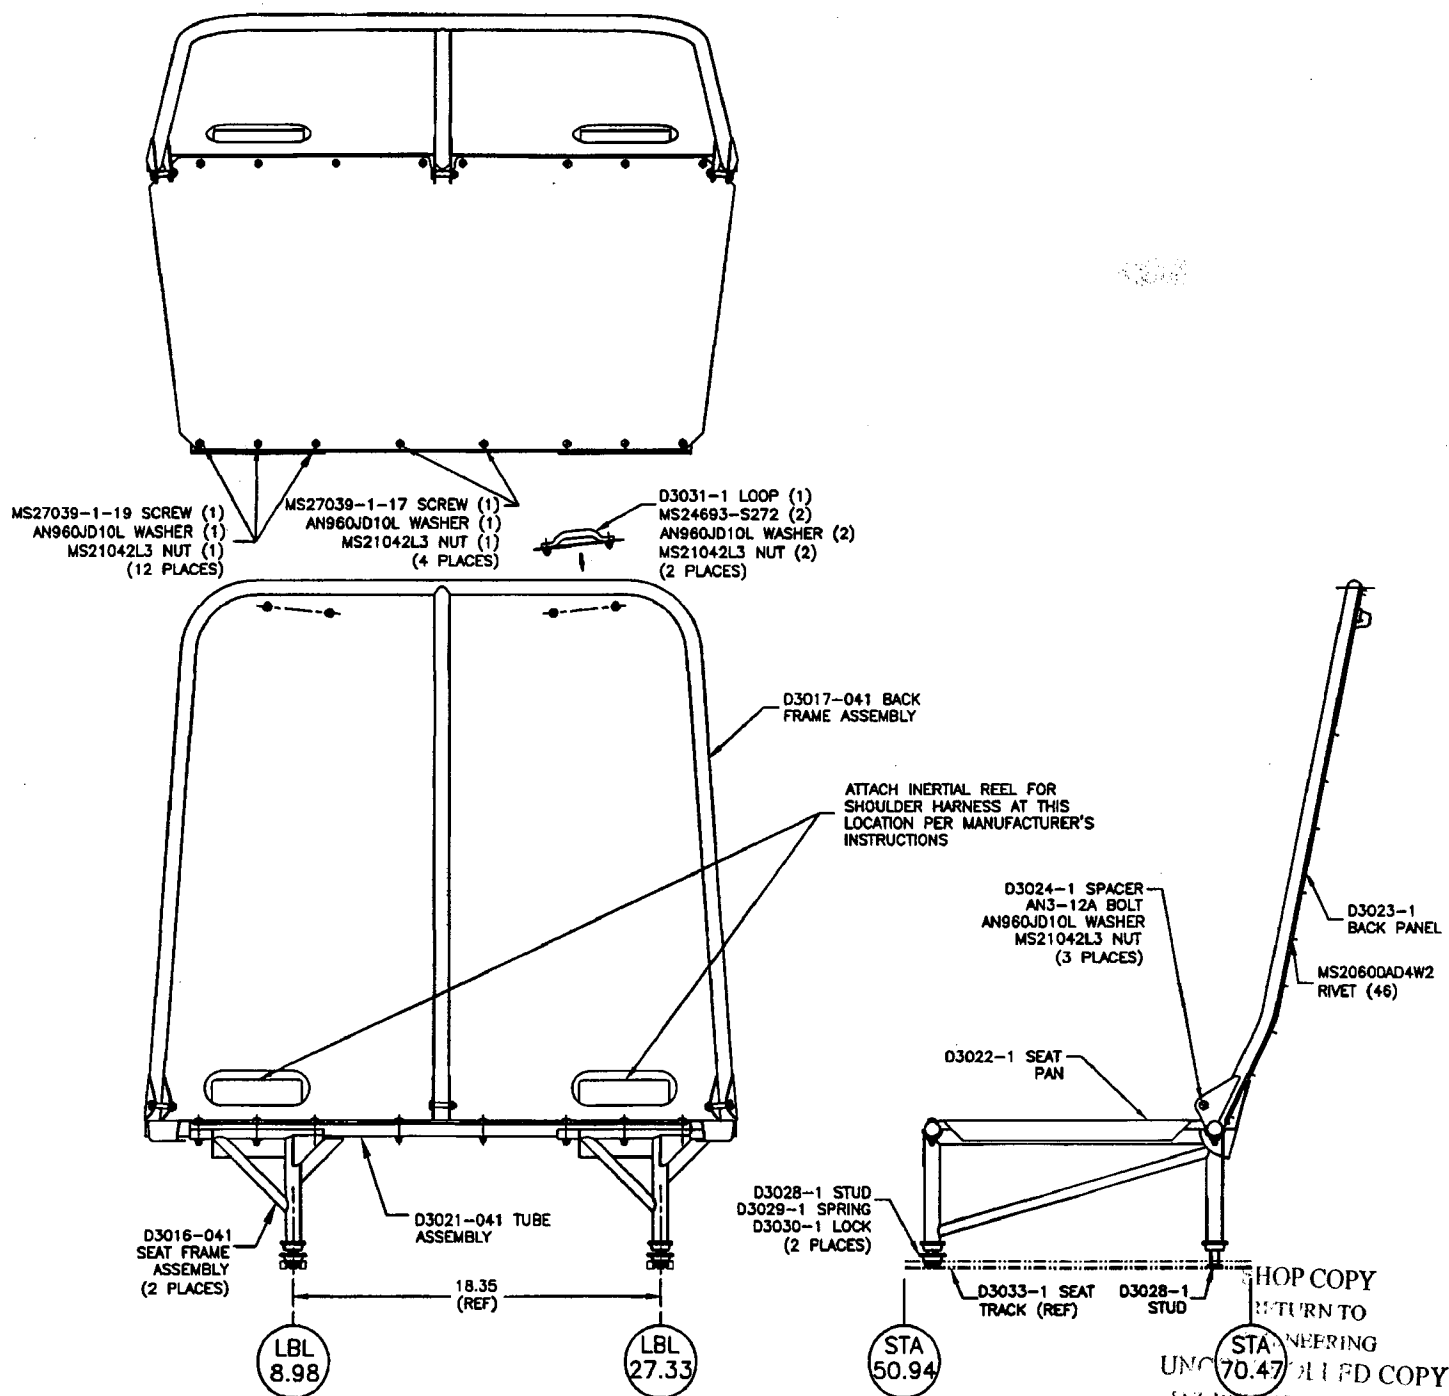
Installation of D350-689-041 Dual High Back Seat Assembly
